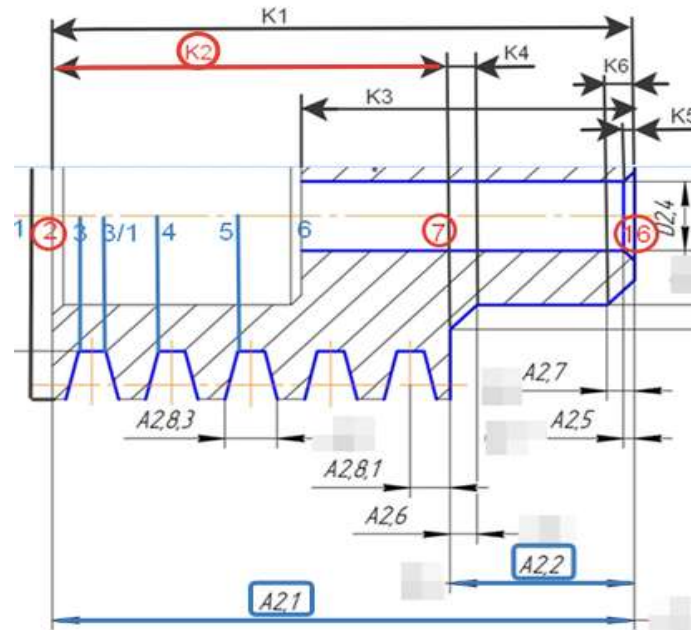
Dimensional diagram of the manufacturing process of a part “pulley”
